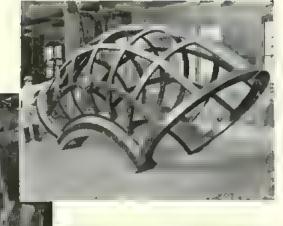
Foundry View Showing Scroll Pattern in the Sand
